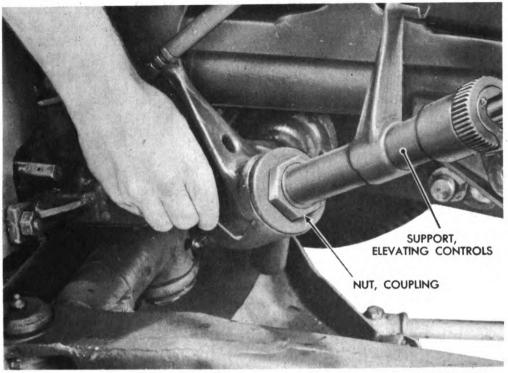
Removing the Traversing Shaft, Flexible Joint, and Controls Bracket Housing
